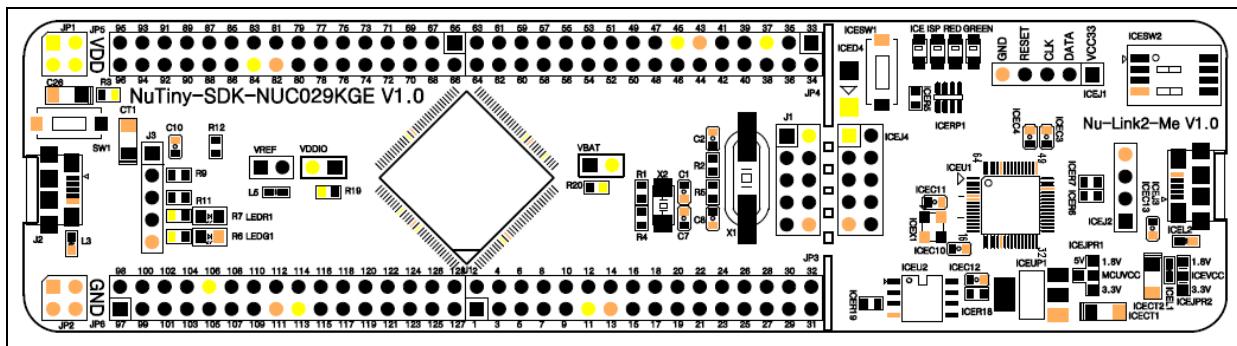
NuTiny-SDK-NUC029KGE PCB Placement
